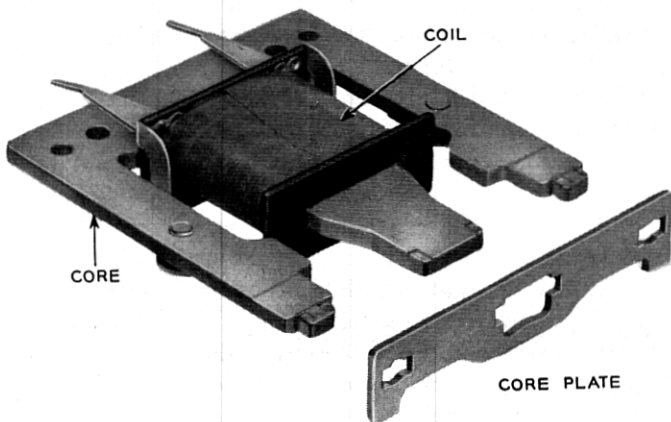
Core legs are held in alignment by the core plate, which is forced on the ends after the coil is assembled.
